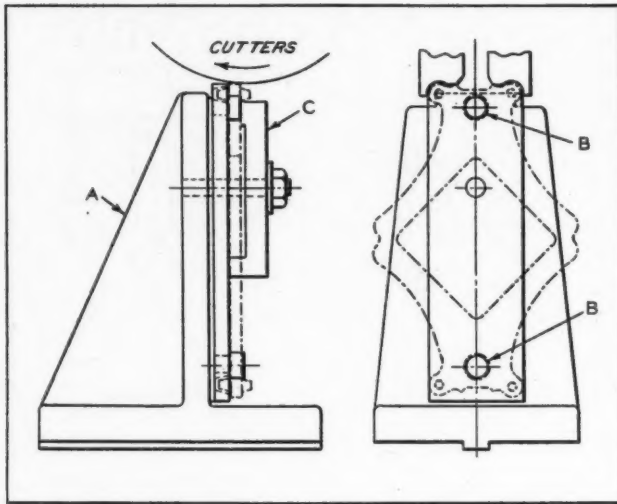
Fixture for Holding Group Forging while Milling Ends of Two Levers
